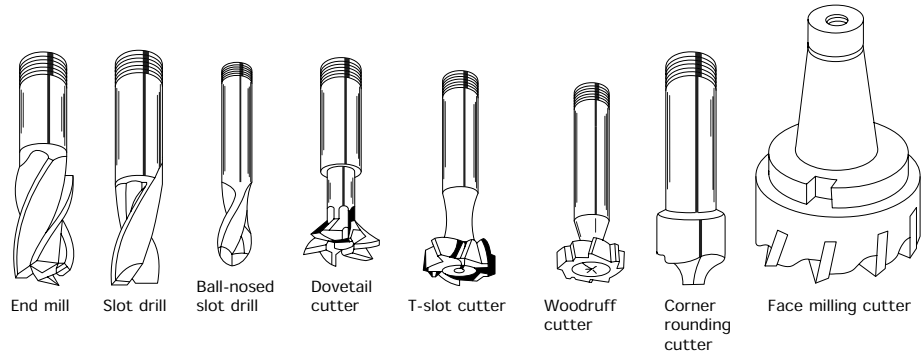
Typical milling cutters for vertical spindle milling machines
